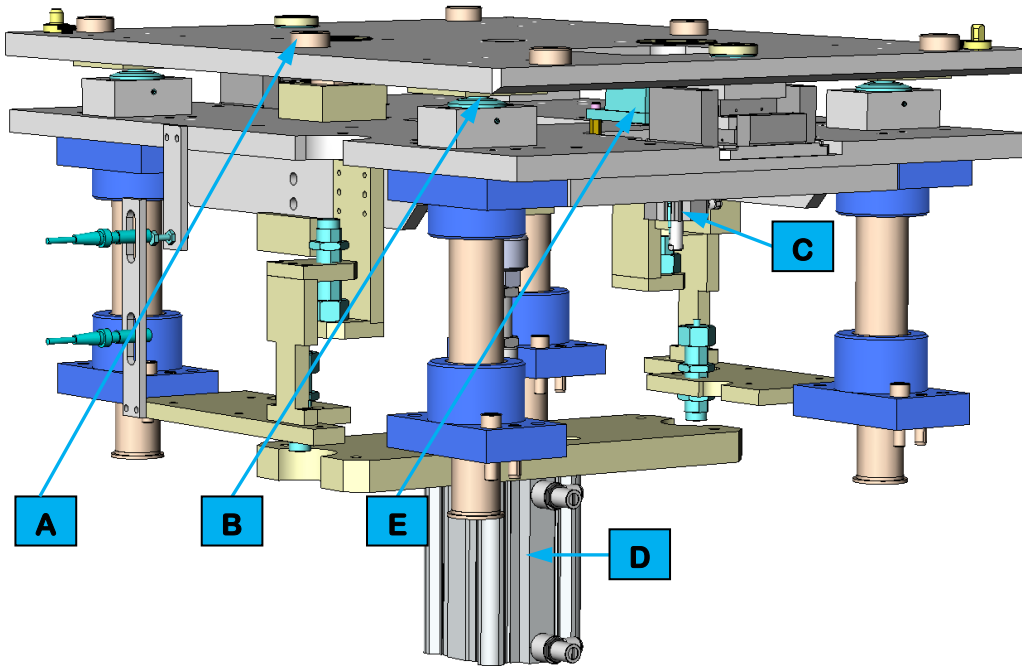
Weld Contact Tooling equipment.
